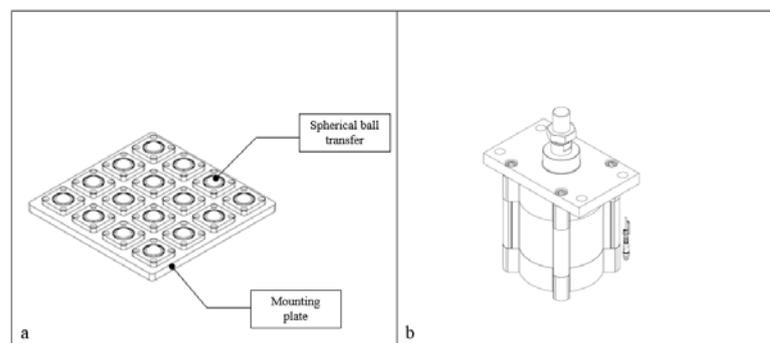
a) Ball transfer unit (McMaster-Carr 2015h, p. 1312), b) Standard pneumatic cylinder (Festo 2016a, p. 2).
